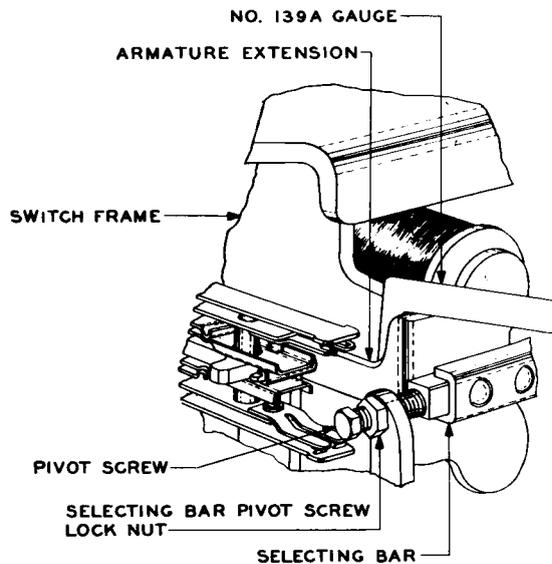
Fig. D — Method of Checking Clearance Between Wide Portion of Selecting Armature Extension and Switch Frame
